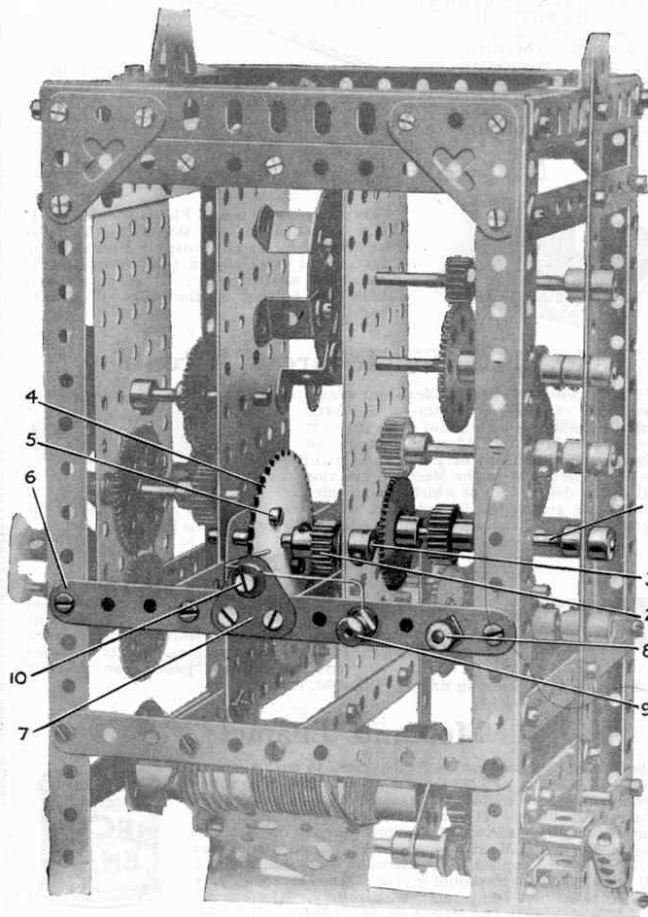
The Meccano Grandfather Clock mechanism, showing the electric Master Control
